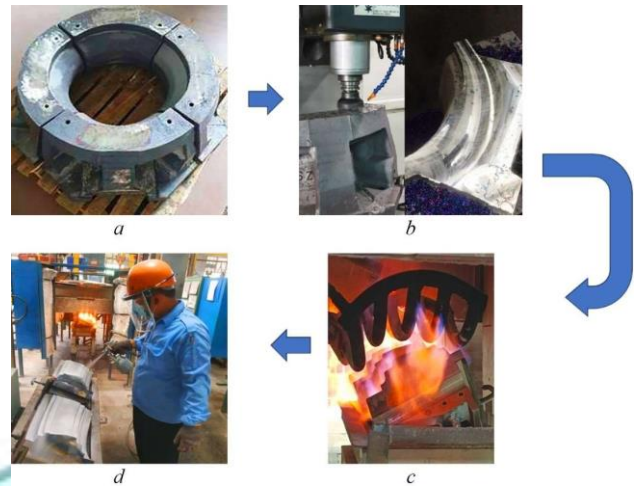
Stages of machining and ceramic coating process: a – side core; b – proses machining; c – proses ceramic coating; d – proses spray finishing
